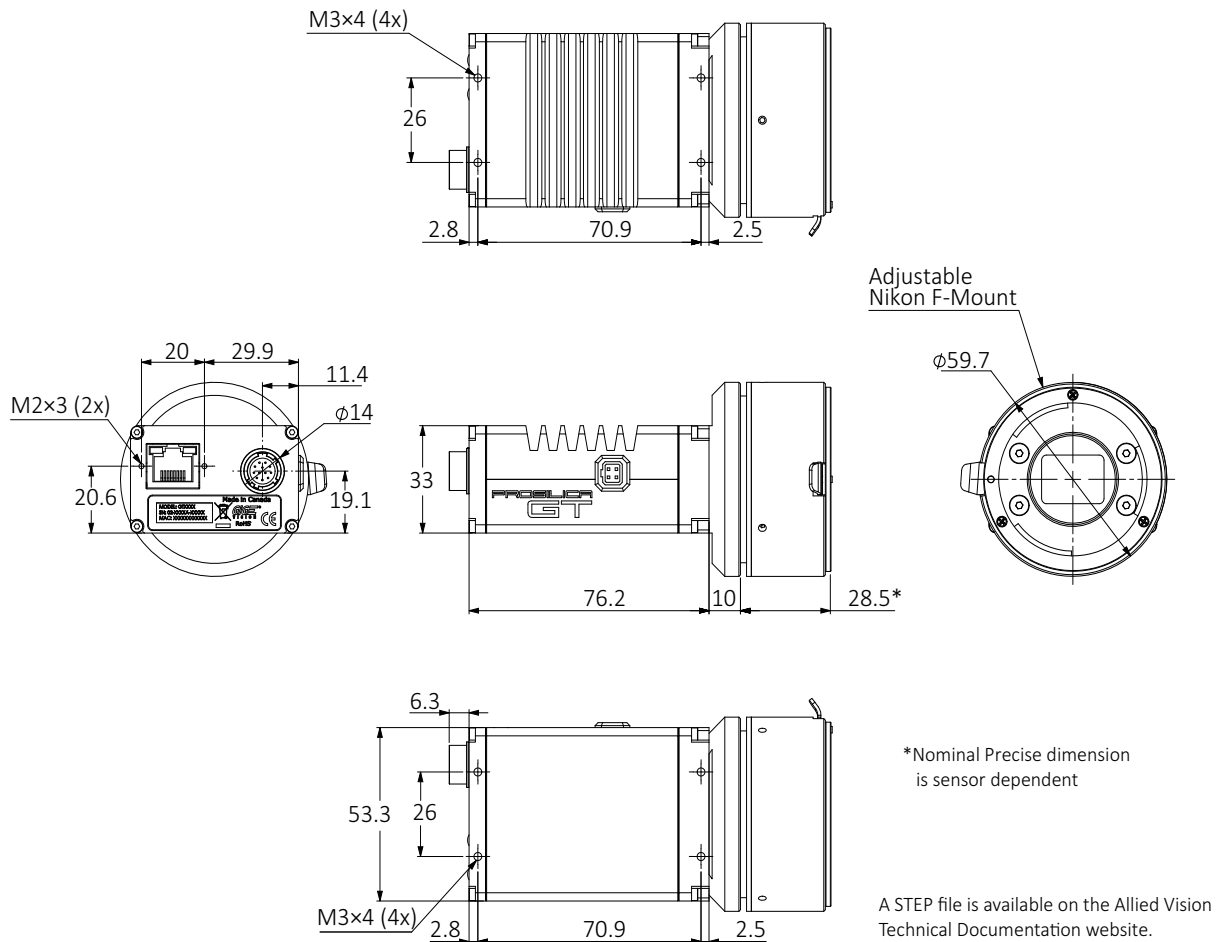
Prosilica GT3300 F-Mount extended format housing dimensions
